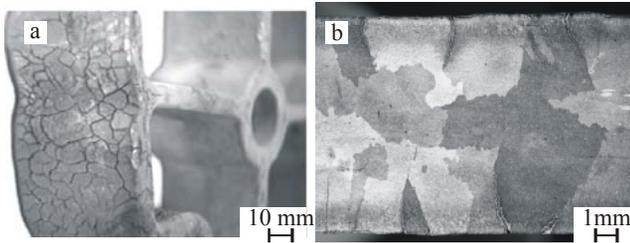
Damage to pallets working in furnaces for thermo-chemical treatment [3, 4]: a) surface cracks network, b) macrostructure of the wall cross-section with visible cracks
